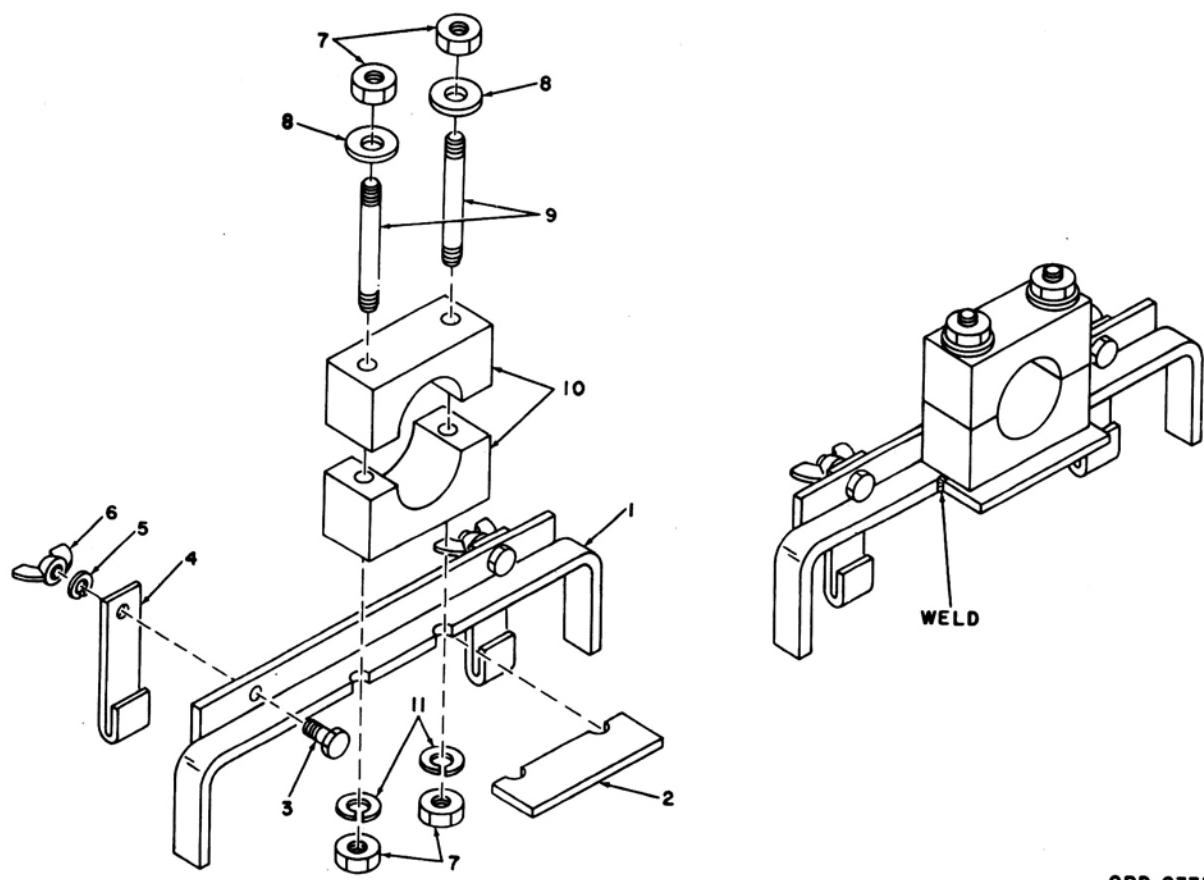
Cylinder assembly holding fixture—fabrication.
